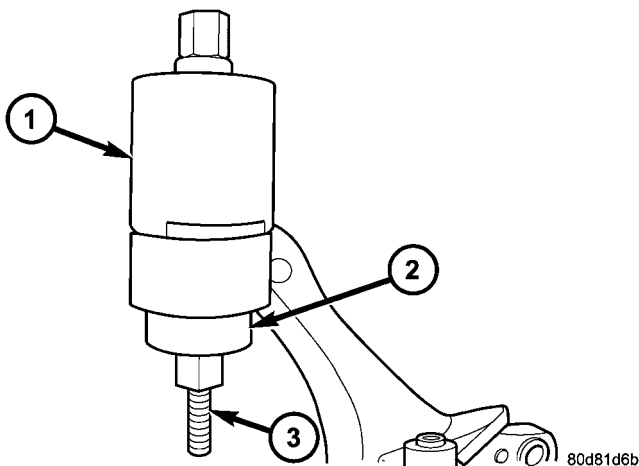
LOWER CONTROL ARM BUSHING - REMOVAL
